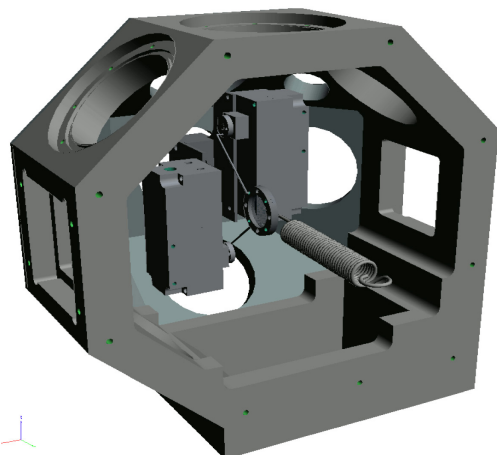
Two-axis swivelling system to uniformly expose the target to the beam and hence energy deposition. The beam traverses the chamber from left to right. The sides and blanking flanges of the vacuum chambers are deleted from the 3D drawing for viewing purposes.
